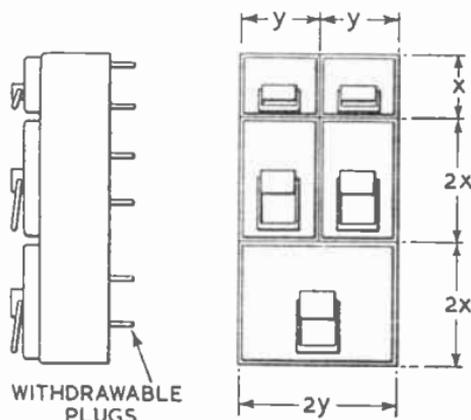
ARRANGEMENT OF UNITS IN UNIT ASSEMBLY SWITCHBOARD.
